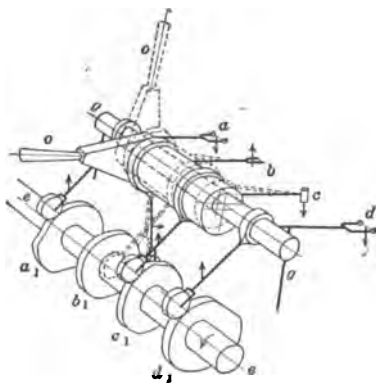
Busch-Sulzer Diesel rocker layout.
